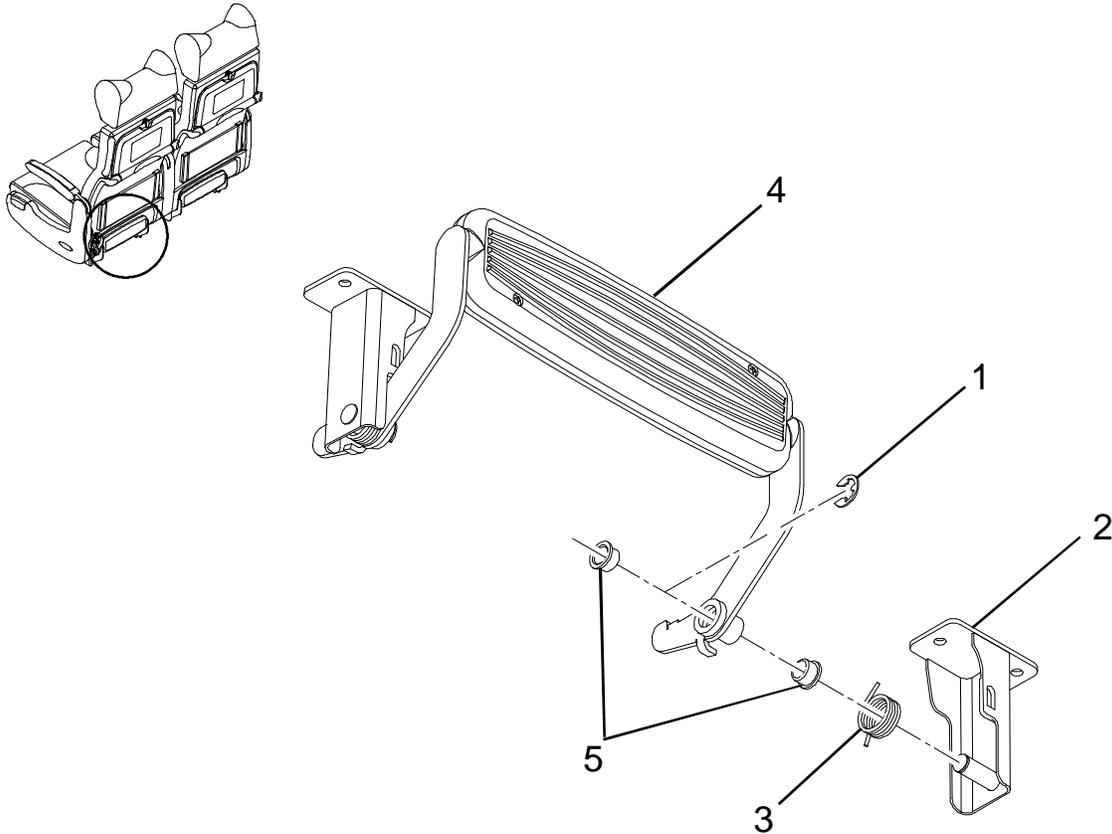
Footrest Torsion Springs and/or Flanged Bearings Replacement
